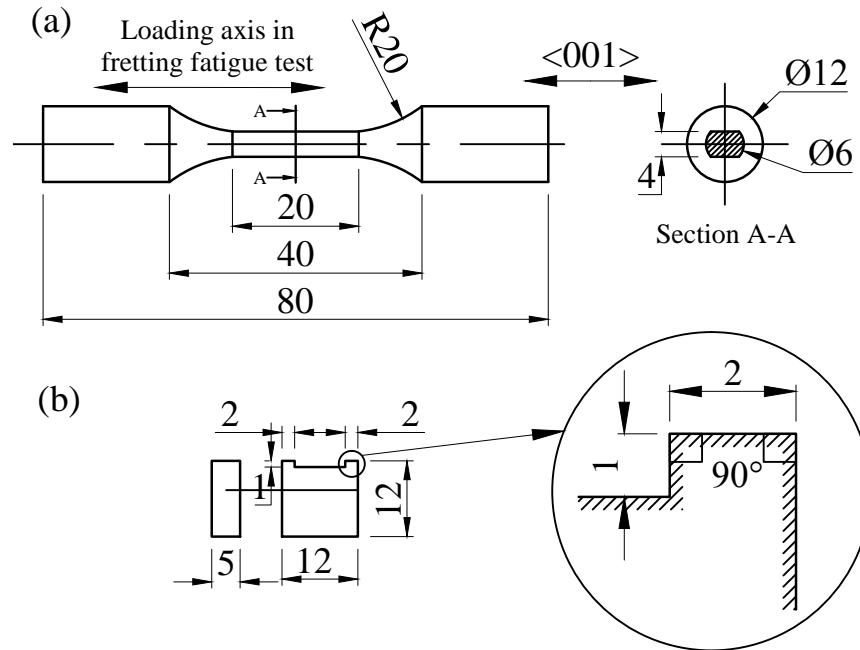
Geometries of (a) CMSX-2 fretting fatigue test specimen (b) IN718 contact pad. All dimensions are in *mm*.
